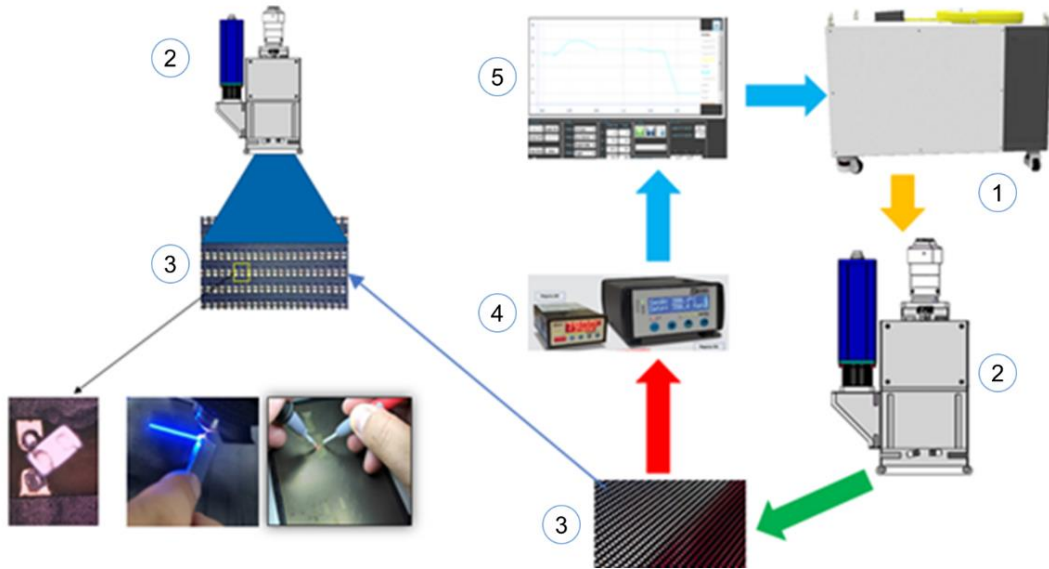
A huge amount of welding for mini & micro-LED
